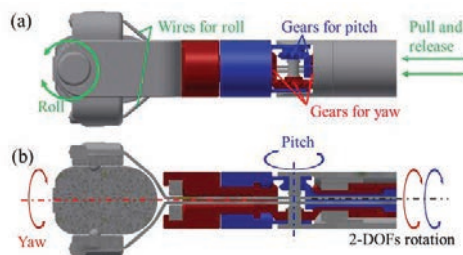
Design of 3-DOF mechanism: (a) Double-bevel-gear mechanism; (b) Cross sectional view
